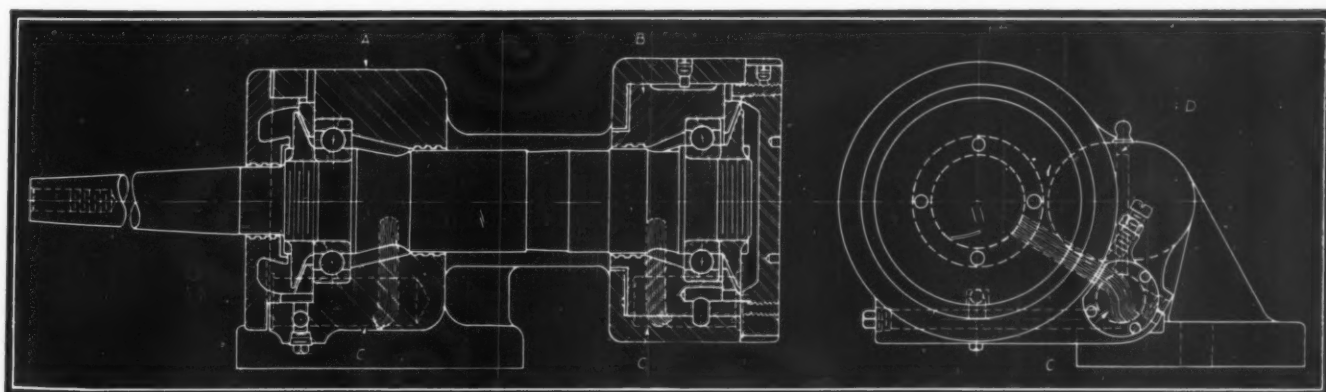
Example of spindle in which weight or mass is used to insure rigidity and absorption of vibration. An adjustable sleeve houses the rear bearing
